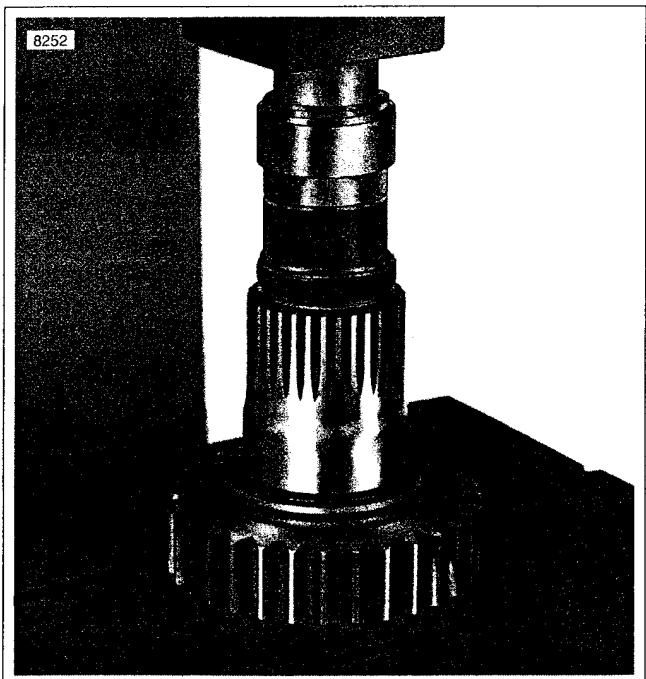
Installing Clutch Side Needle Bearing in Main Drive Gear
